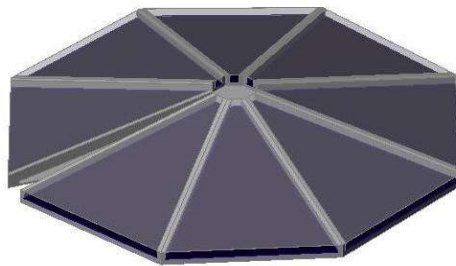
Final Storage Model Concept Design; 8 Panels Assembled
